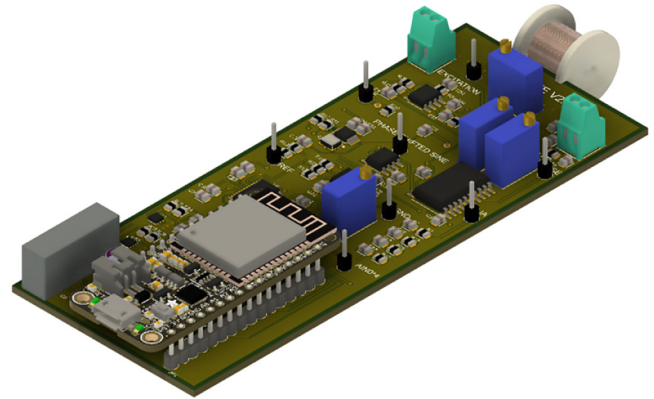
Prototype PCB CAD image including on board micro-controller and sensor head. The sensor head (Fig. 1) is constructed around a 3D printed former (LEDO 6060 Resin) mounted on the PCB edge. PCB size =  $5 \times 12$  cm and weight = 45 g. Power and data share a 5V USB cable connected to the micro-controller.
